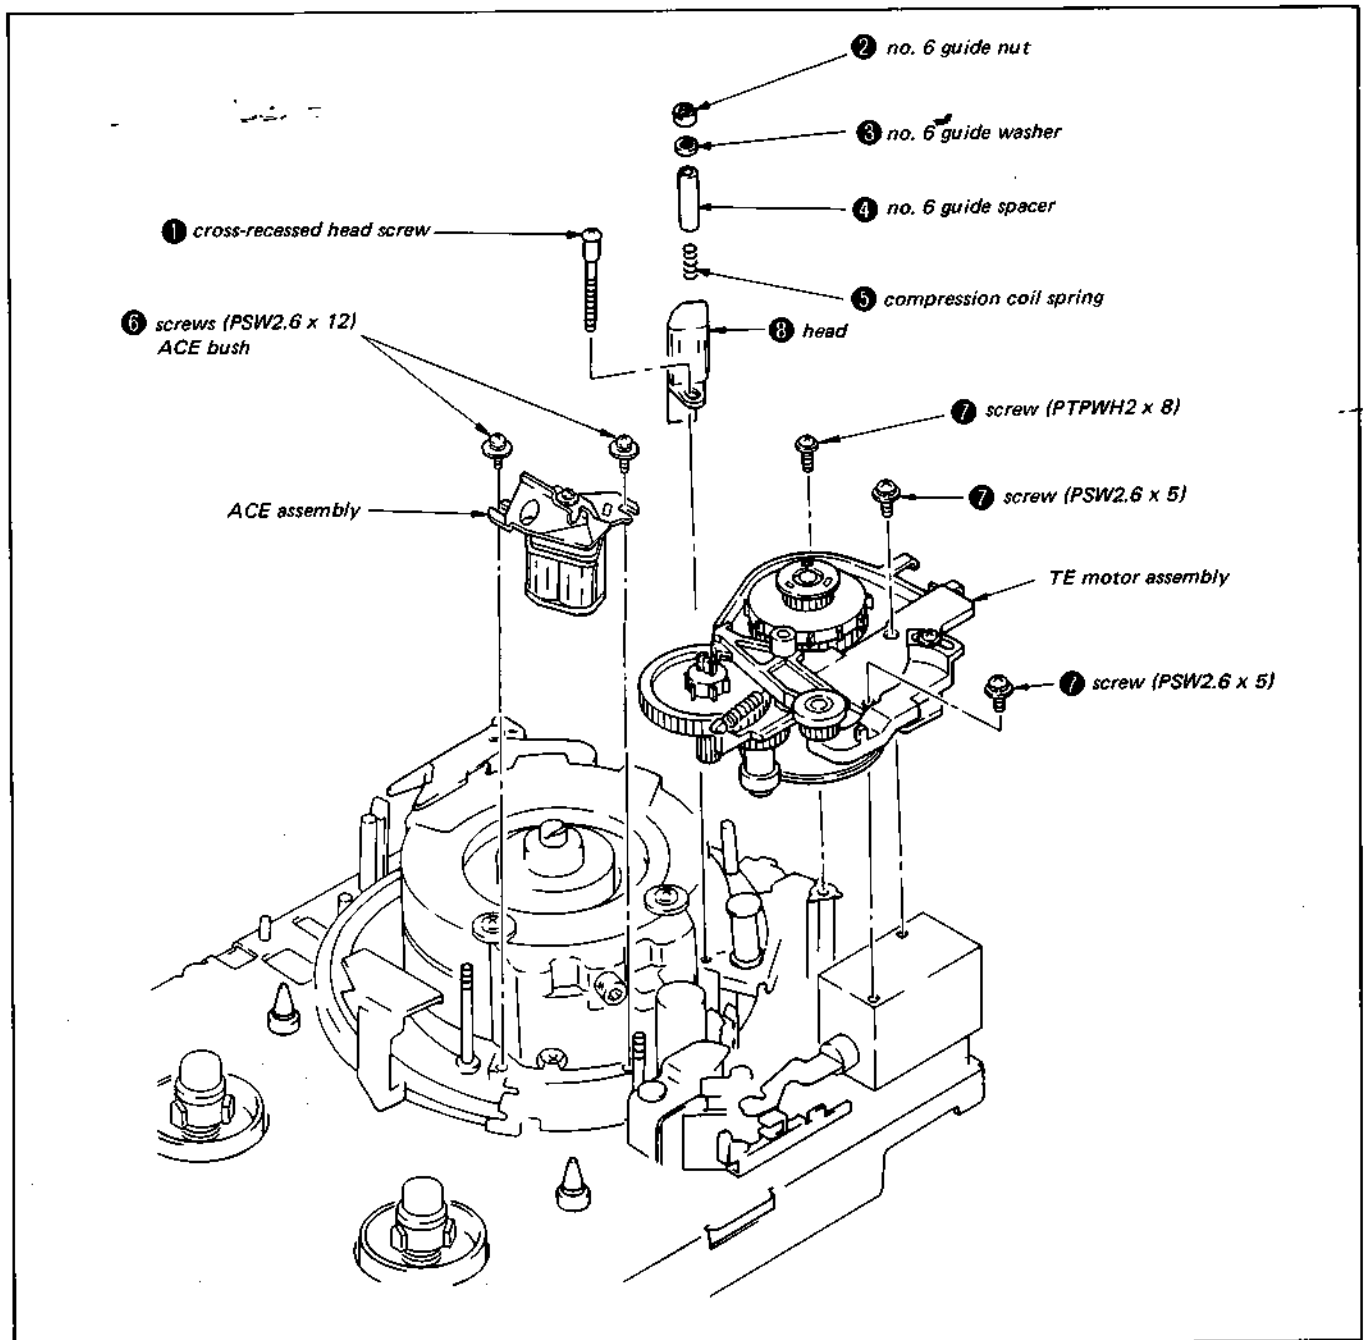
Removal of the ACE assembly, FE head and TE motor assembly
